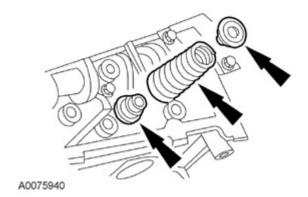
Locating Valve Spring Retainer, Valve Spring And Valve Stem Seal Courtesy of FORD MOTOR CO.
